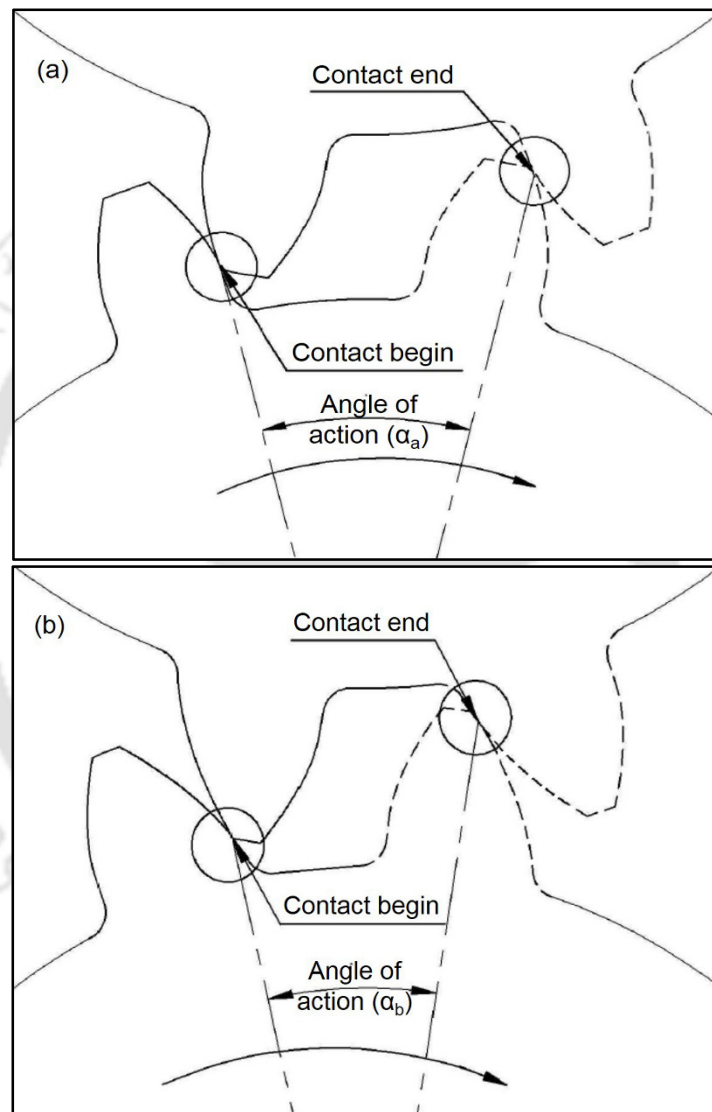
Gear tooth engagement of (a) symmetric gear pair and (b) asymmetric gear pair
